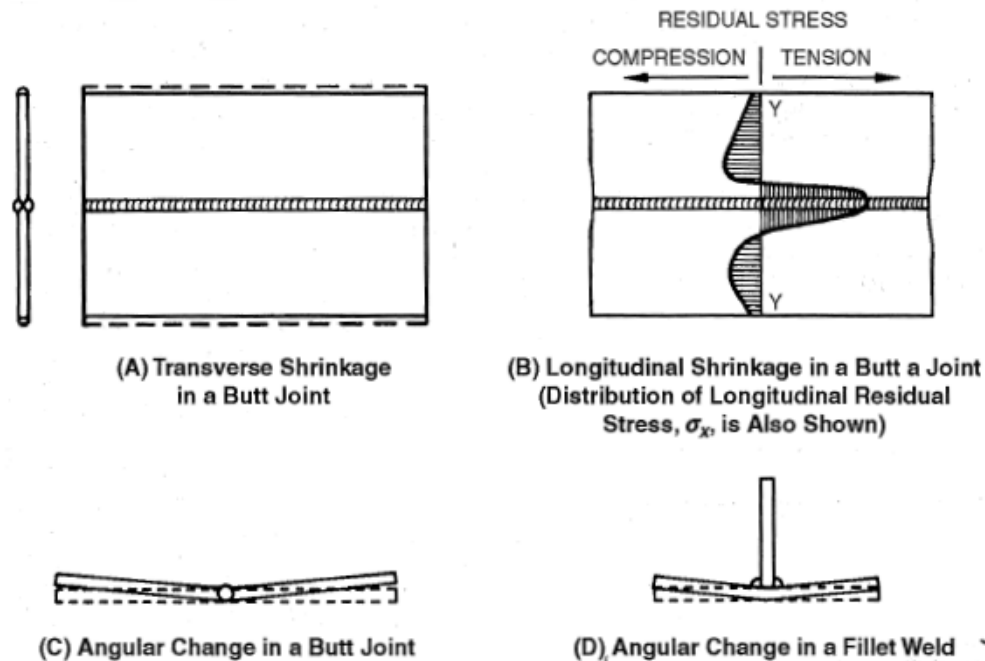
Fundamental Dimensional Changes in Weldments^[4]
